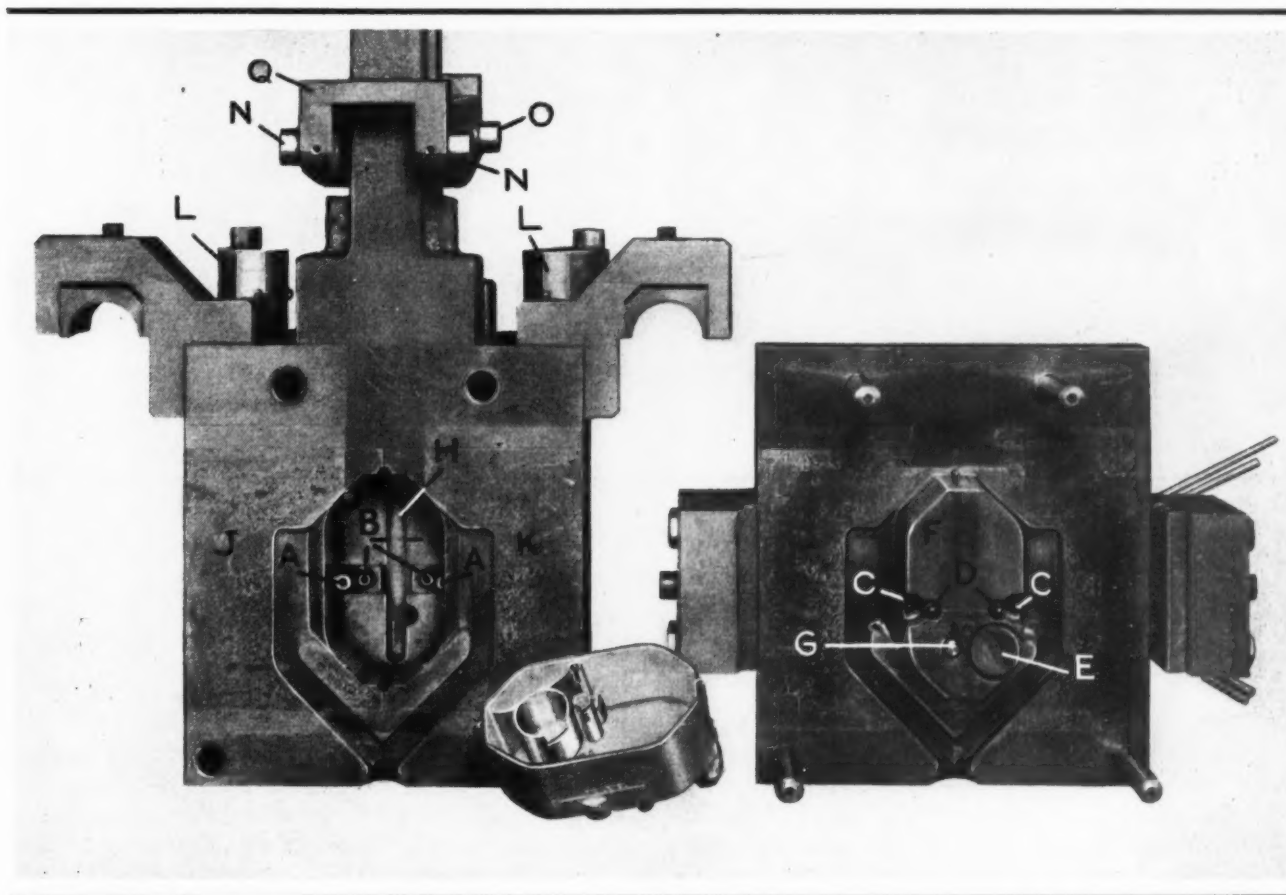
Dies Used in Producing the Oil-burner Float-valve. The Movable Die at the Left is Shown with its Two Slides and a Moving Core in the Closed or Casting Position
